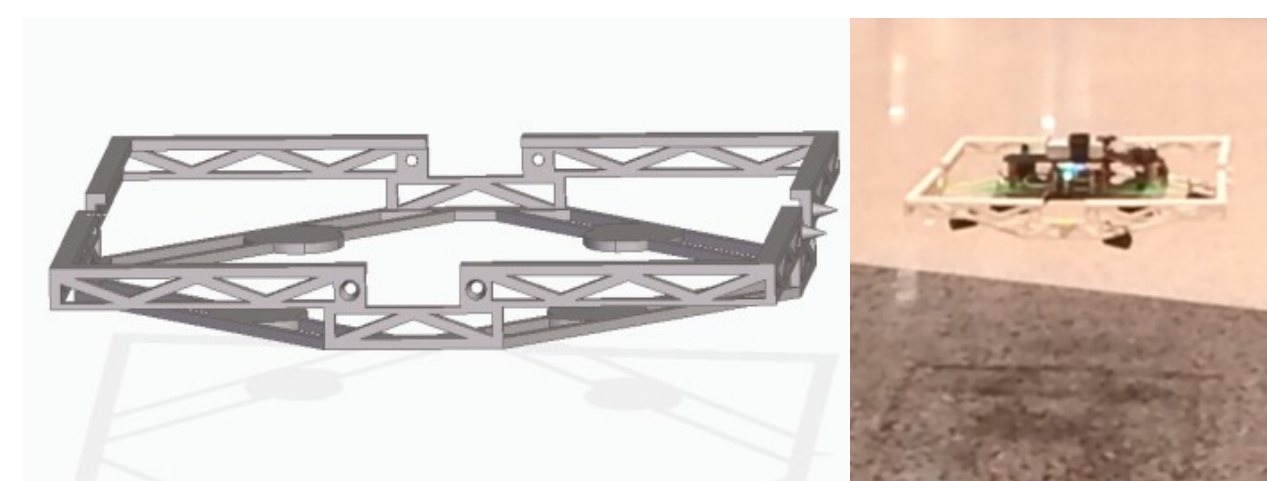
On the left the Solid Edge design of the shell. On the right the printed shell on a flying drone.
